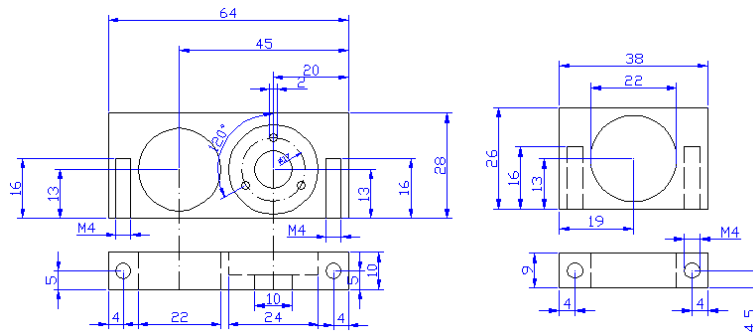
The CAD over the motor holder (left) and the bearing holder (right).
